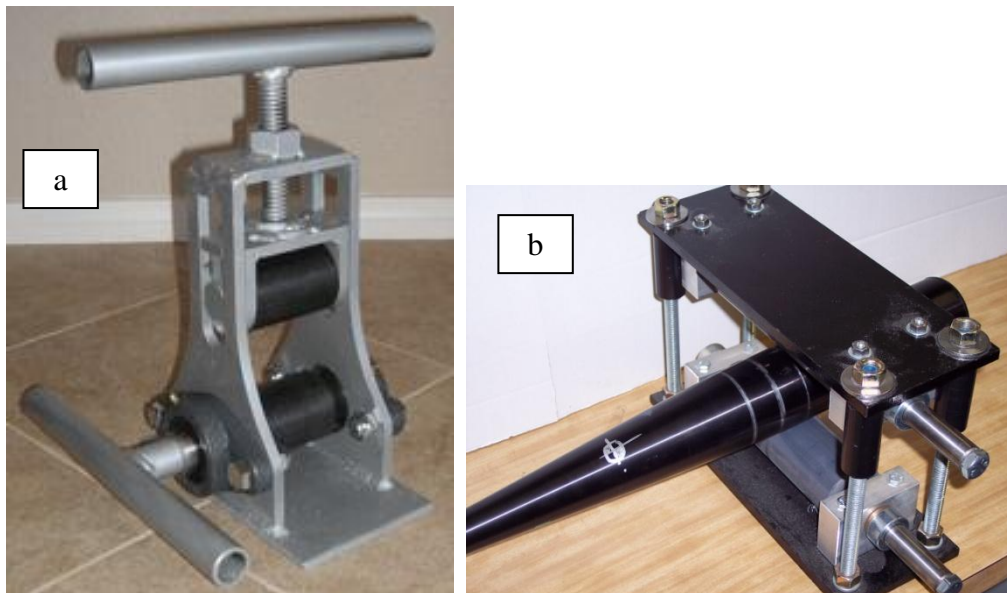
Typical perpendicular bat roller [22] (a) and bat loading (b).
